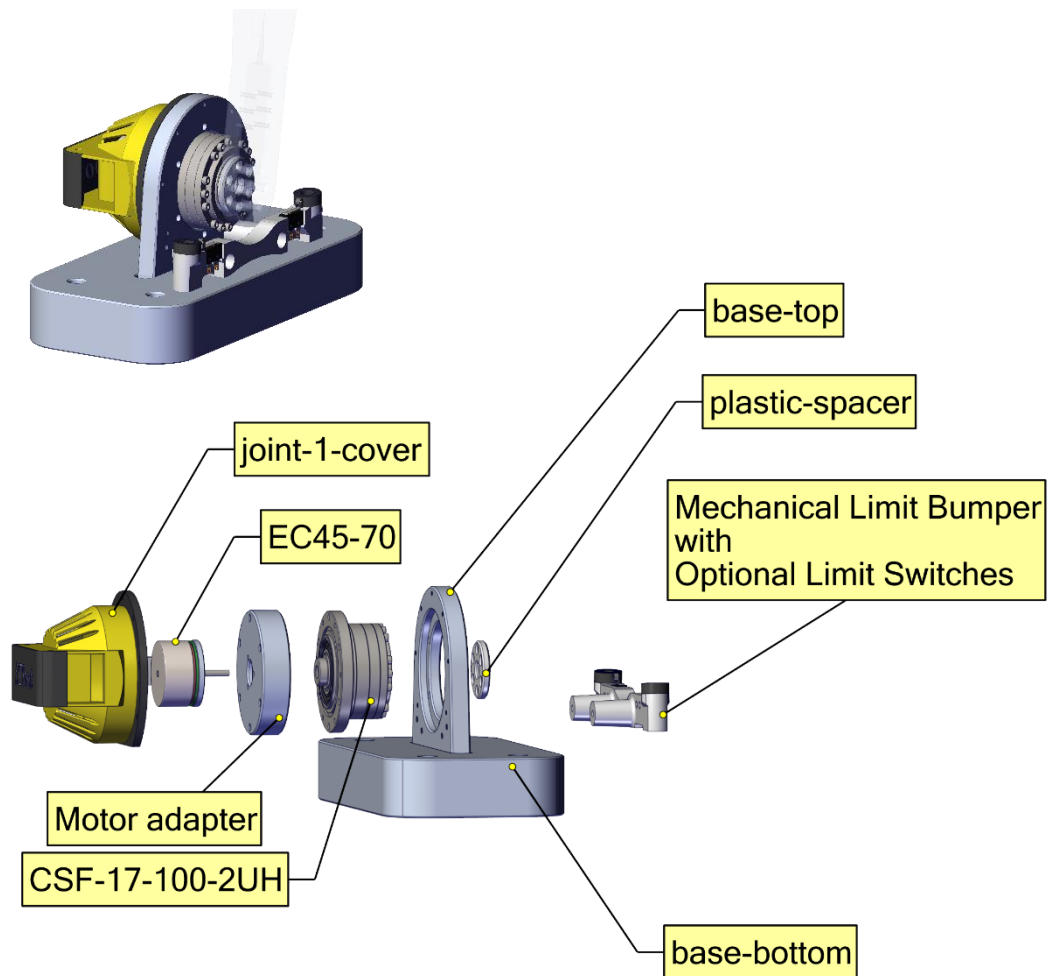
Base assembly (Top Left), Exploded view of Joint-1 (Bottom)
